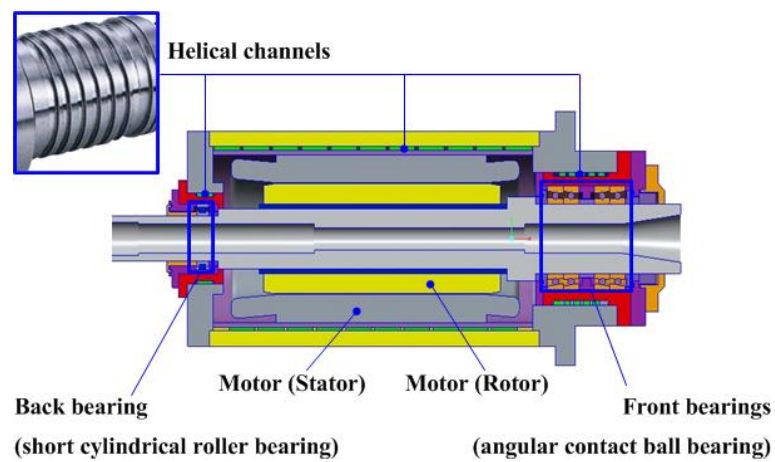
Heat generating parts and helical channels of motorized spindle unit
